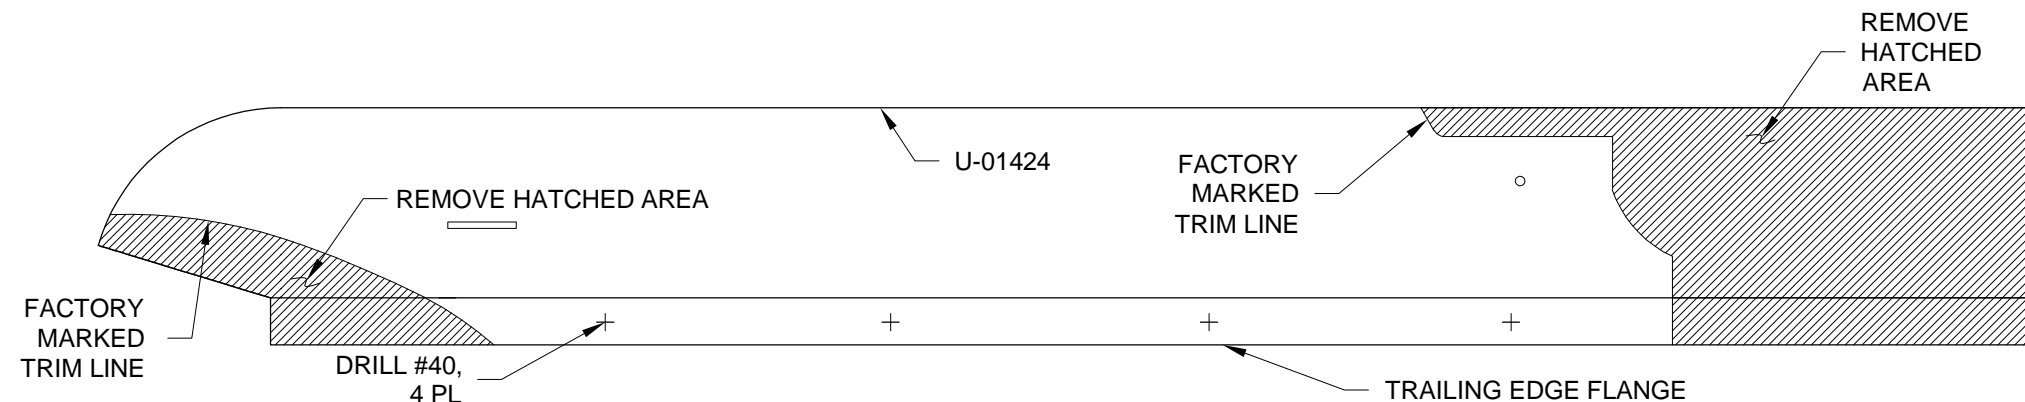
TRIMMING THE NOSE GEAR LEG FAIRING
